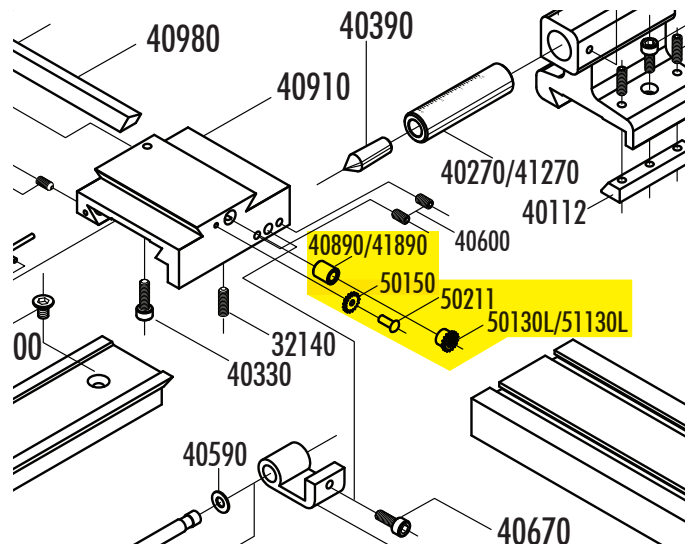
The component part numbers in this exploded view are highlighted in yellow for your reference.
